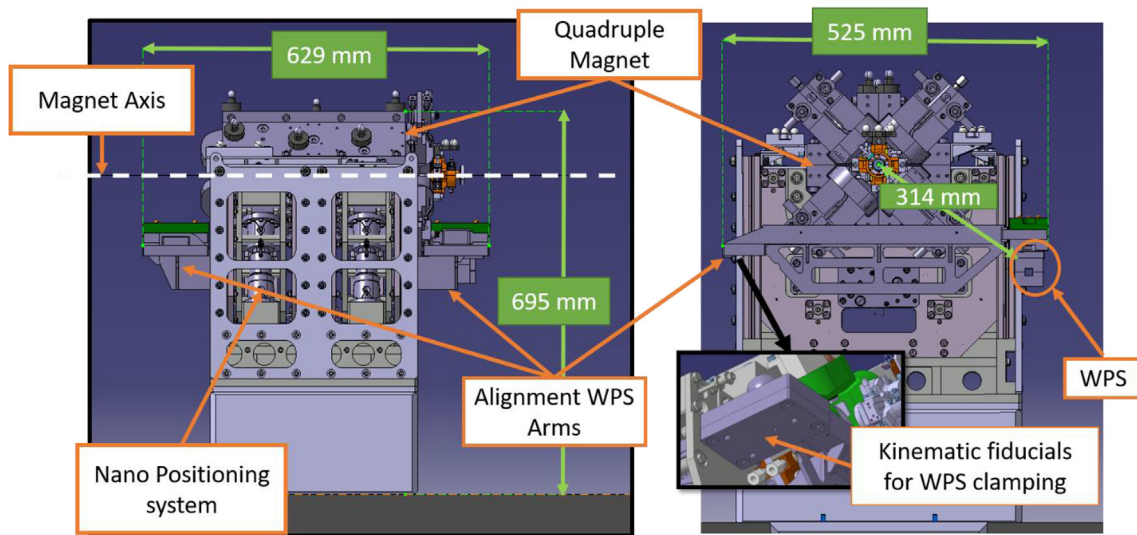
CLIC T1 Module prototype CAD, Left: Side view, Right: Front view.
